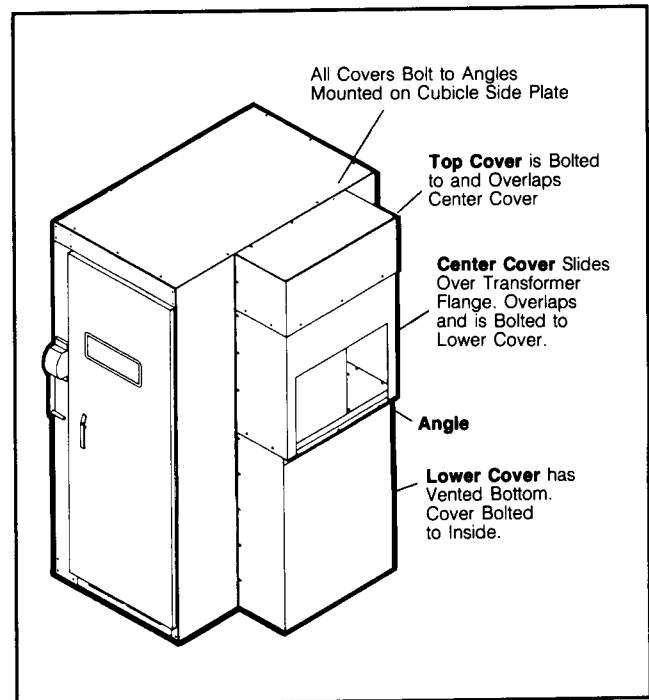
Flexible Cable Connections to the Transformer, Protected by a Hood Assembly
